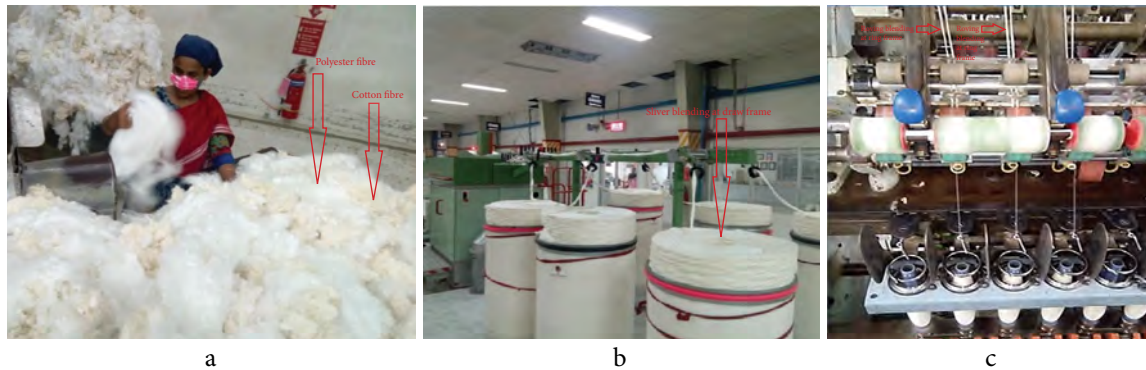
Blending of: a) fibres at blow room, b) slivers at blending draw frame and c) rovings at ring frame
